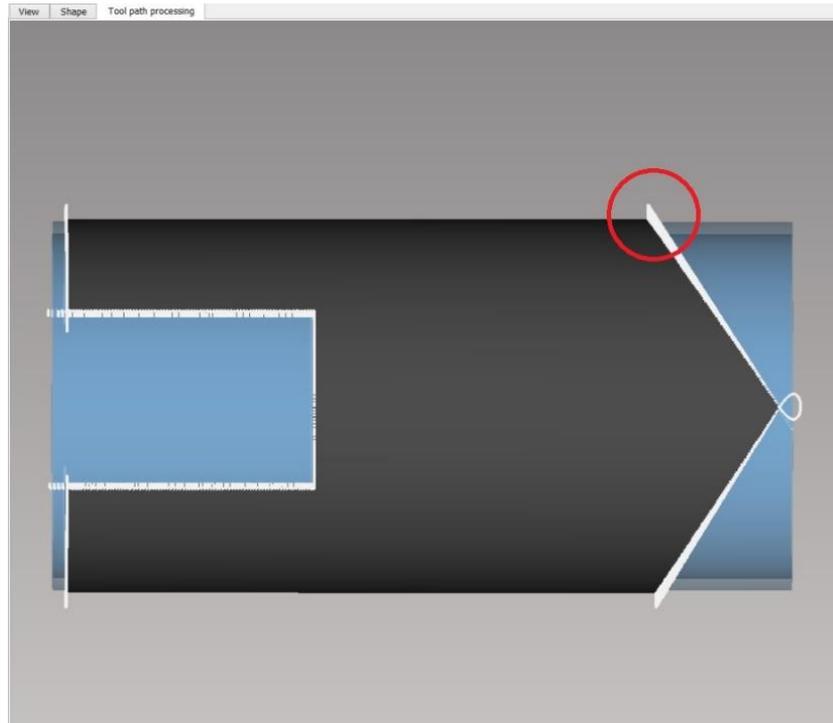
Tool path processing view (processed cutting paths) – straight cutting head limitations
